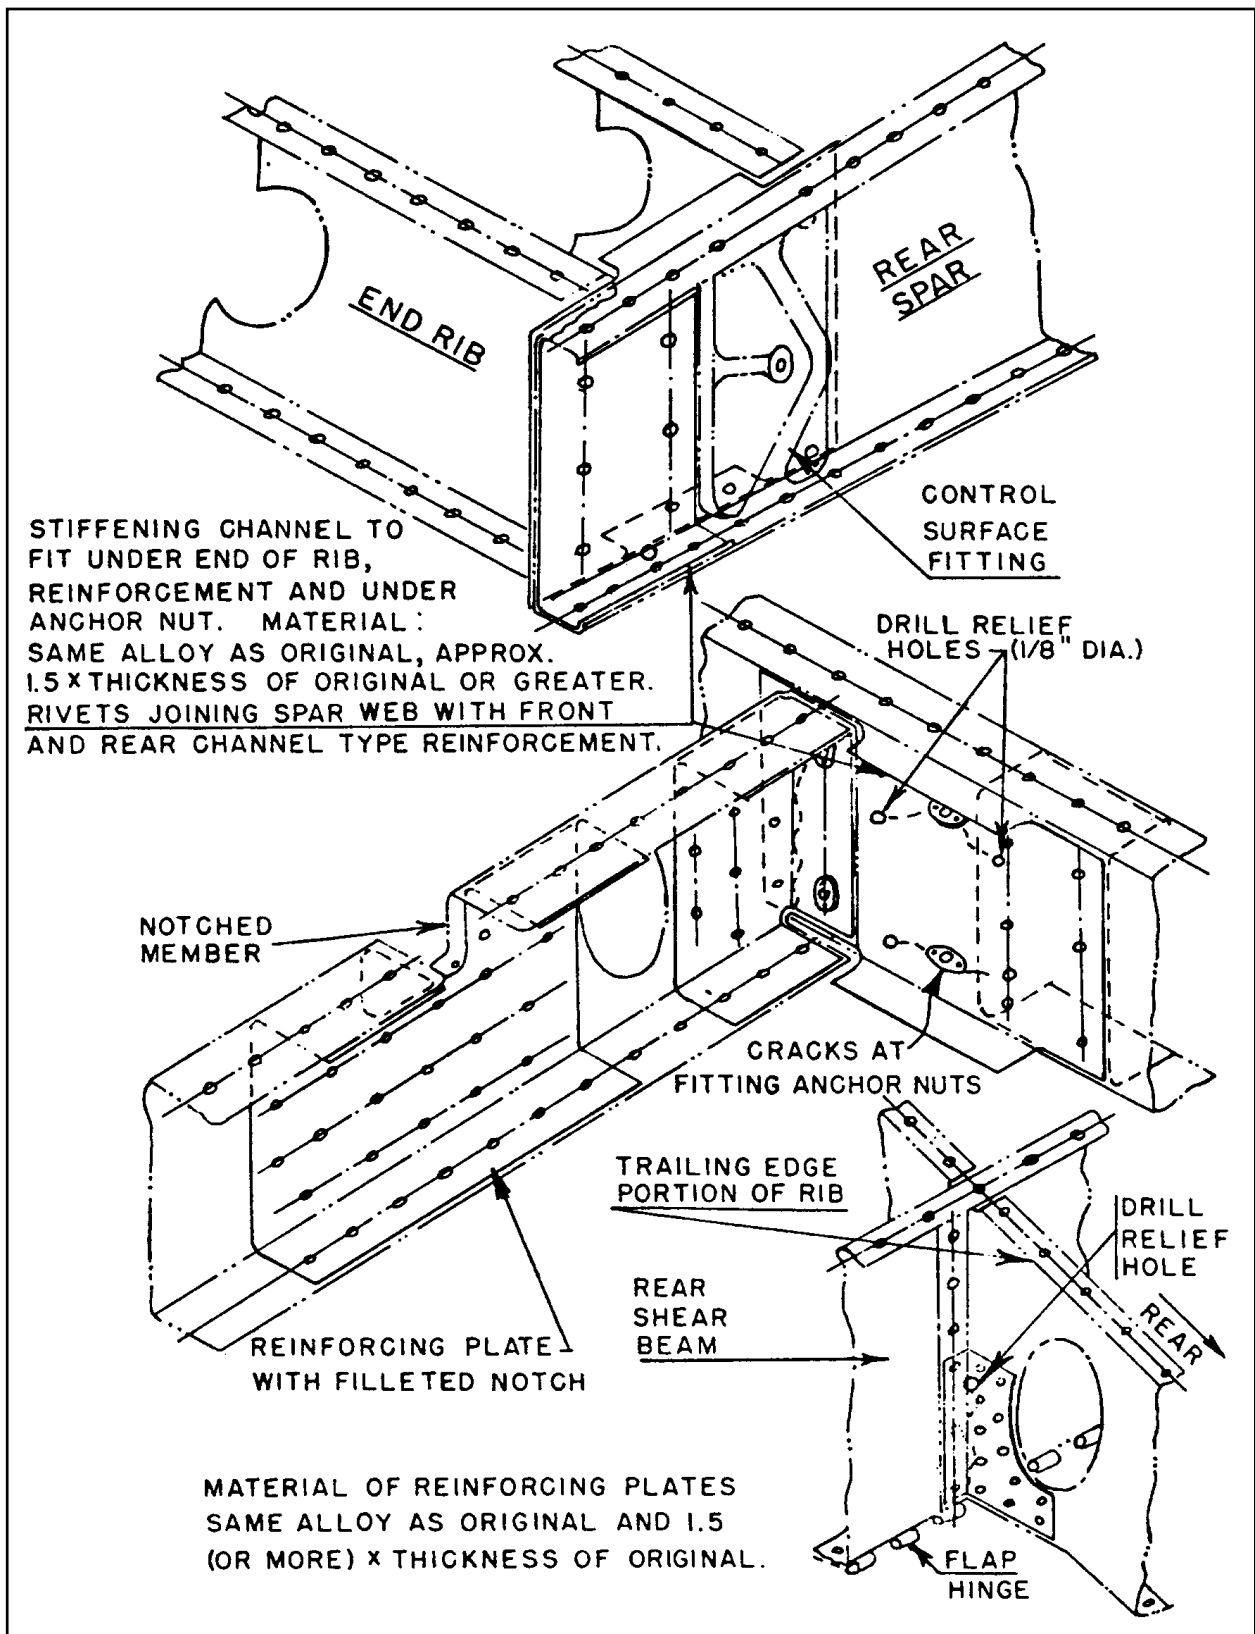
Typical methods of replacing cracked members at fittings.
